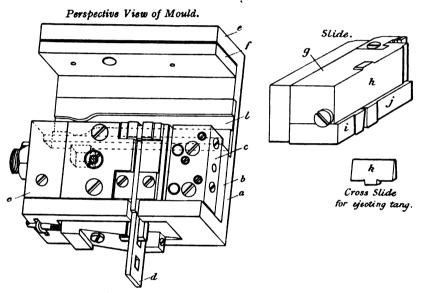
Monotype mould; single-blade. Scale: about half size.
